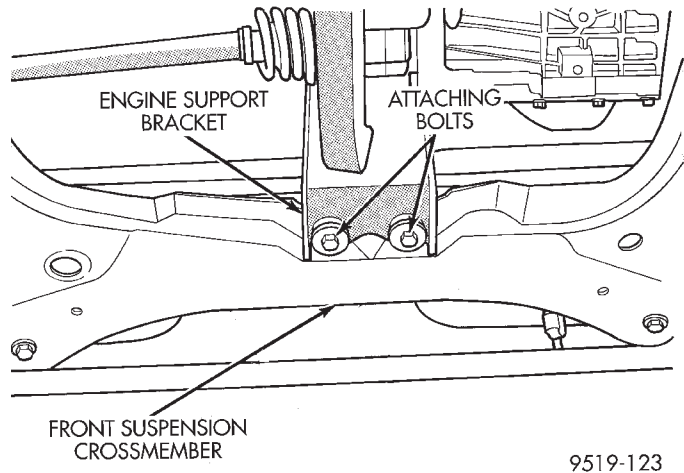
Engine Support Bracket To Crossmember Attaching Bolts
